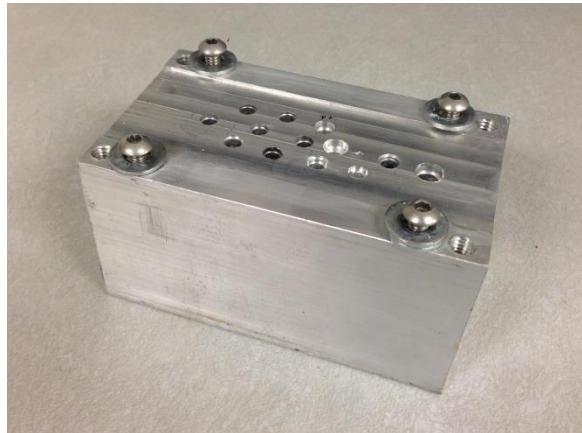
The fixture designed and manufactured for lower die friction drilling.
